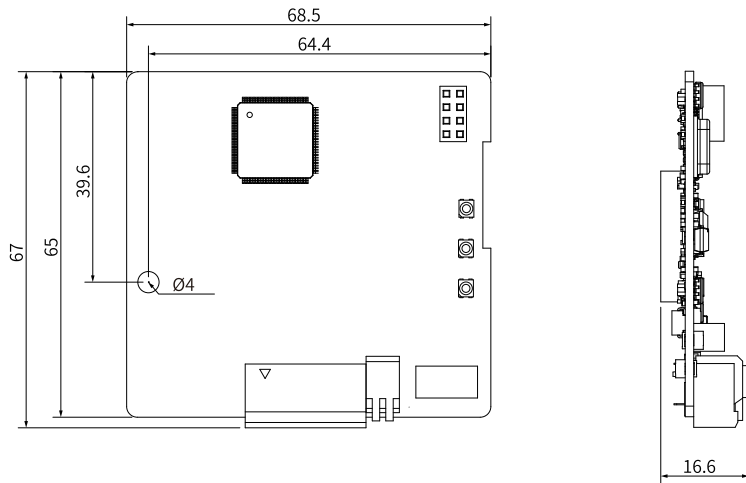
MD580-SI-RS1 card dimensions (unit: mm)
